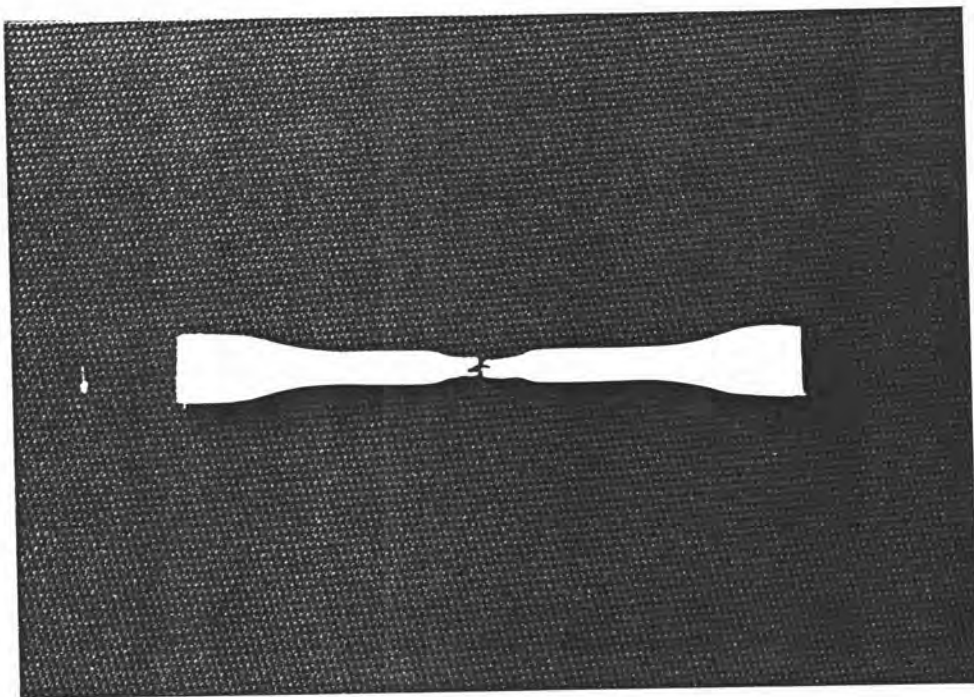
Tensile fractured specimen of CaCO₃ filled HDPE composites with 0.1 filler volume fraction.
